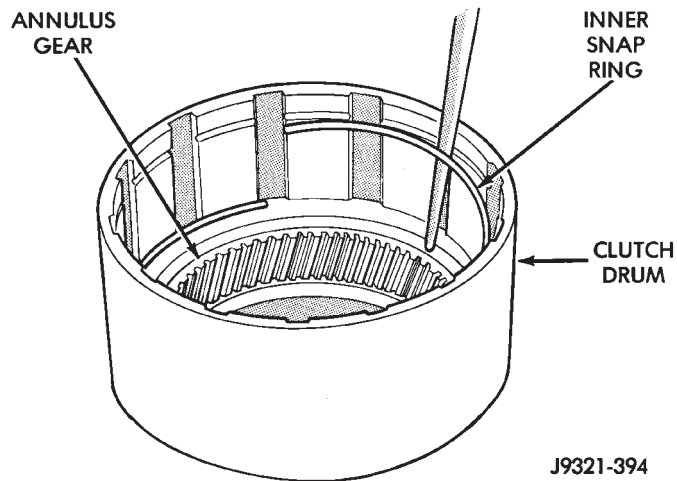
Clutch Drum Inner Retaining Ring Installation
